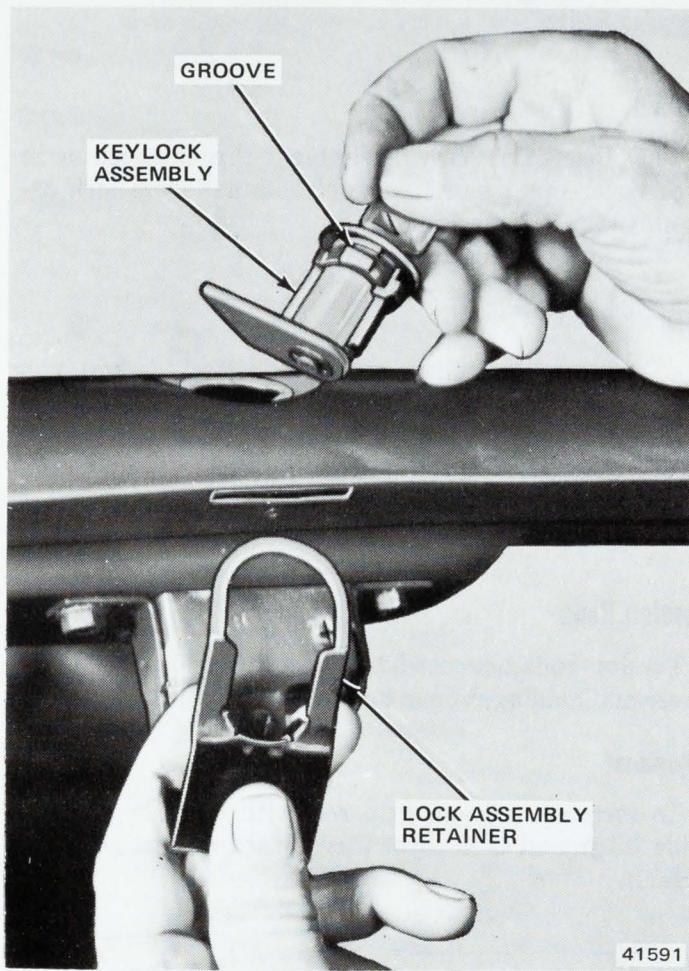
H-48 Key Lock Assembly—Matador Coupe
